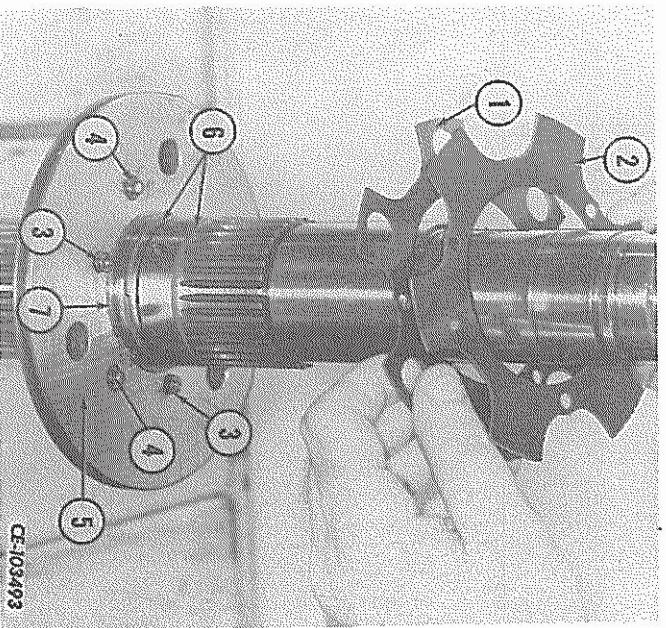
Removing the Reinforcing Disc and Disc Valve
